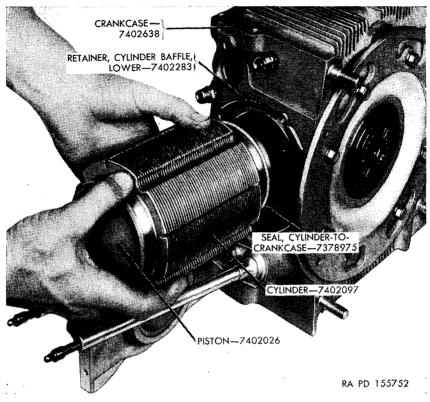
Removing cylinder, piston and connecting rod from crankcase.
